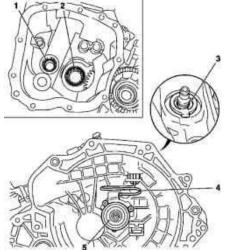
Removing the gearbox components: 1 - bearing shaft, 2 - bearing main shaft, 3 - bush mounting discharge line 4 - flow line, 5 - a working cylinder clutch
